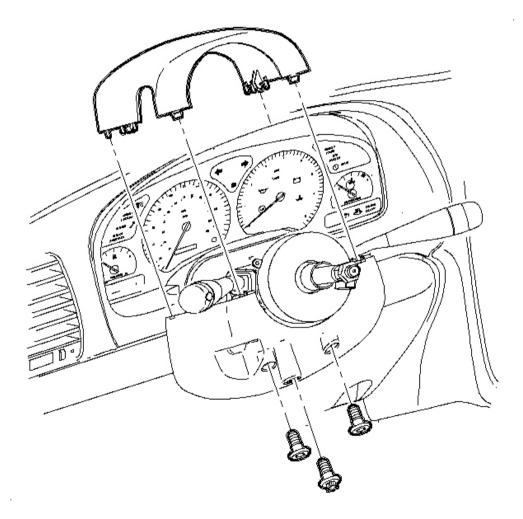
Lower Steering Column Cover & Screws Courtesy of GENERAL MOTORS CORP.
